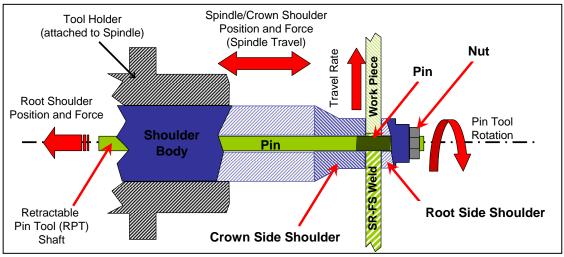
Self-Reacting Friction Stir Welding Process
